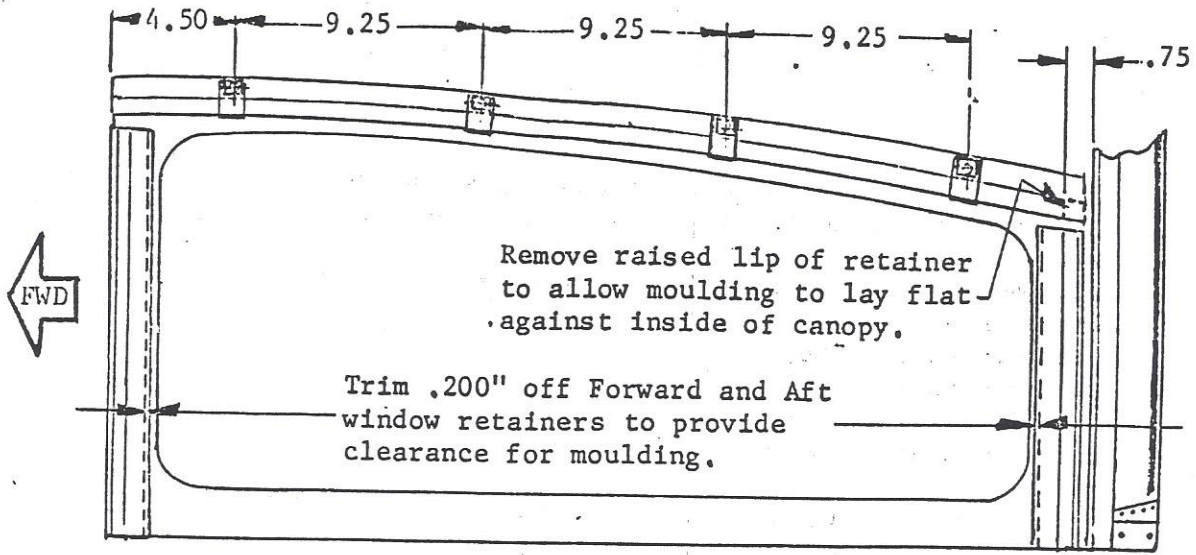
CANOPY WINDOW RETAINER TRIMMING
